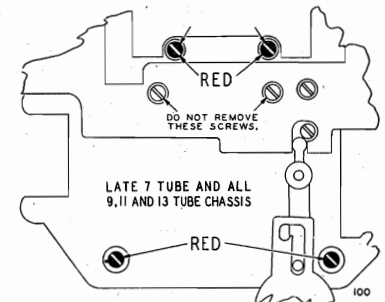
Location of 4 Red Mounting Screws in Late Models
